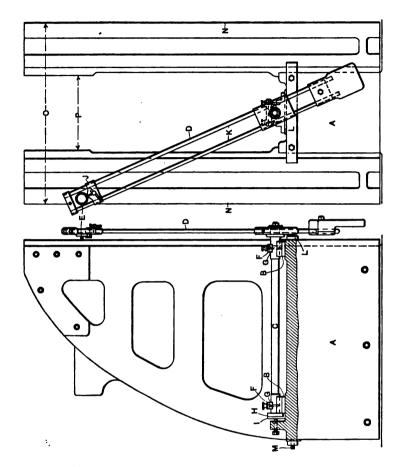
Special Fixture used for Testing Alignment of Housing Faces, provided with Sweep for Carrying Starrett Indicator
